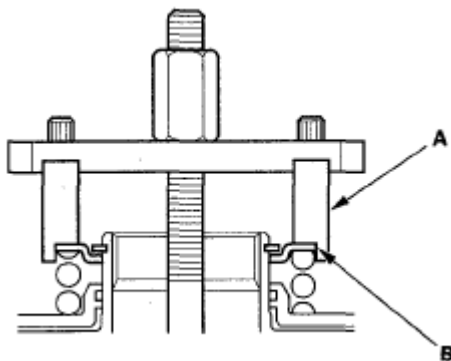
Identifying Clutch Spring Compressor Of Spring Retainer
